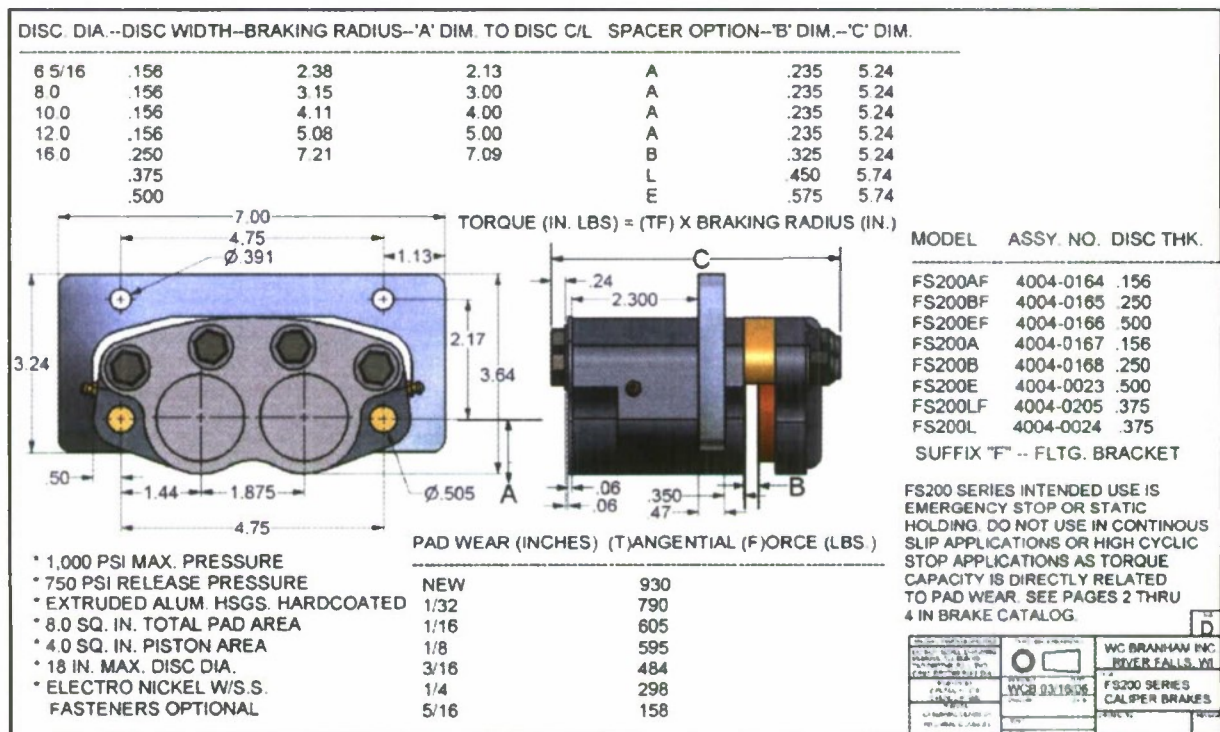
FS200 hydraulic spring applied brake caliper specifications sheet.
